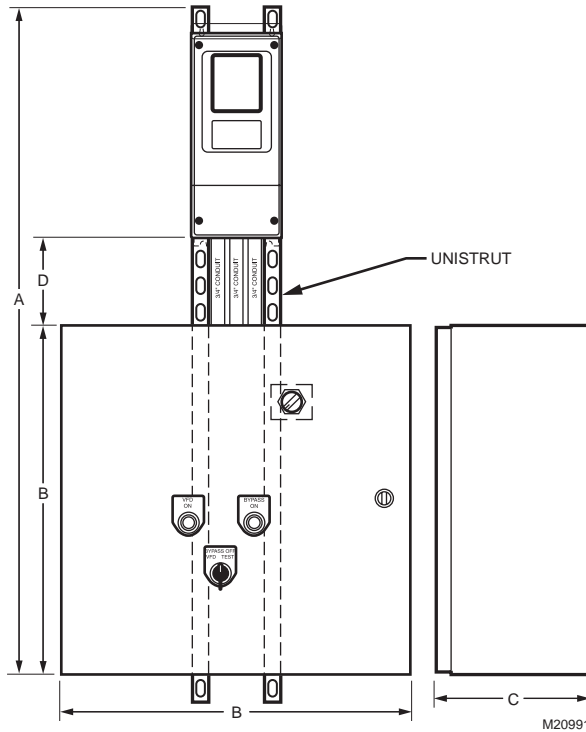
Dimensions of the NXS NEMA1 Assemblies
